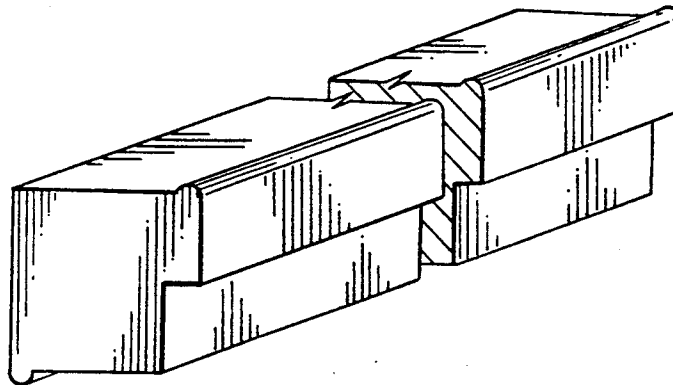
is a perspective view of a third embodiment of an edge moulding showing my new design;
